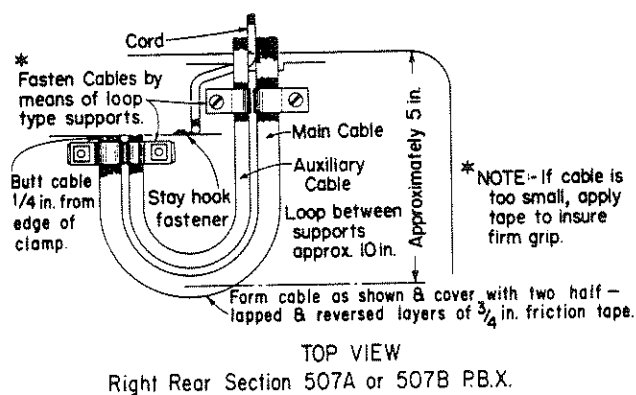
Typical Cabling and Cording Arrangement for 507-type PBX with Prefabricated Sheet Metal or Die-Cast Aluminum Chassis
